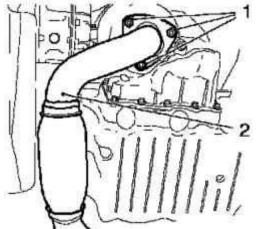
Removing the terminal silencing: 1 - nuts, 2 - Front Exhaust
